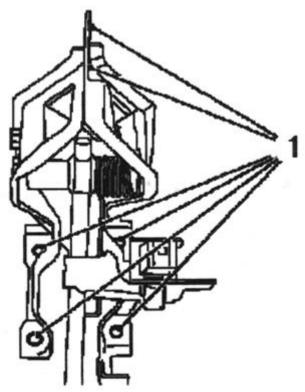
Bolt fixing pedal Tormo for: 1 - bolts;
